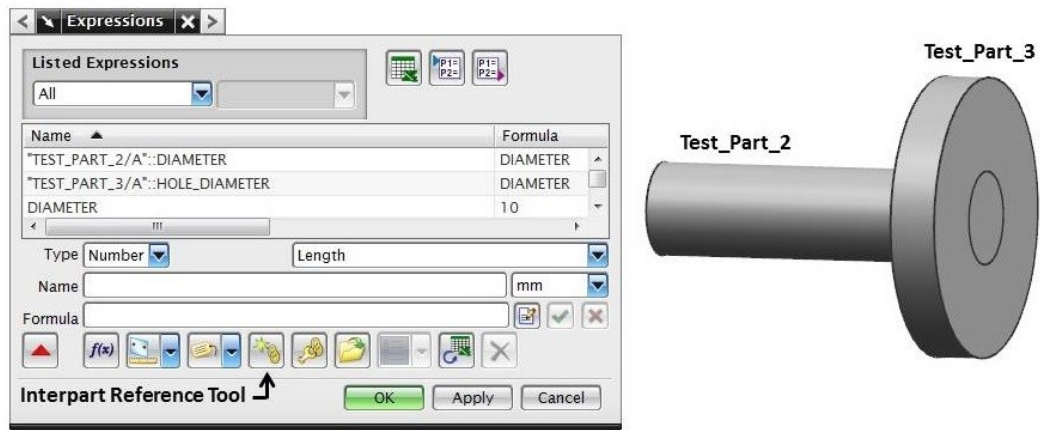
Using Interpart Reference tool to control Expressions on assembly level.
